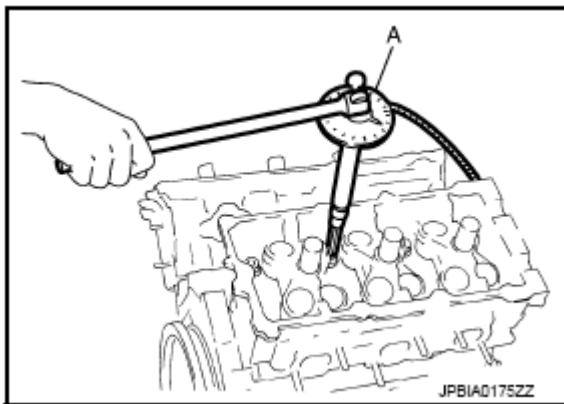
Checking Cylinder Head Bolt Tightening Angle Using Angle Wrench
